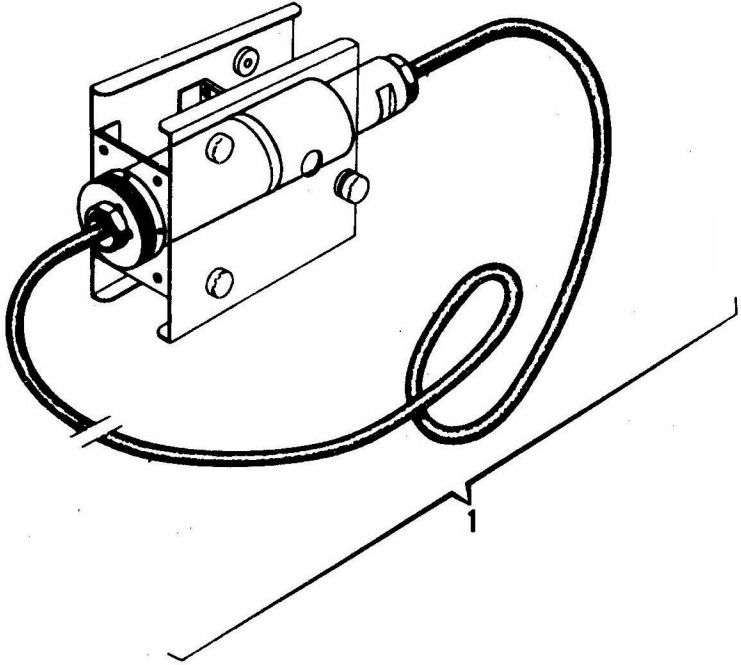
GAMMA PROBE EXTENSION CABLE ASSEMBLY
